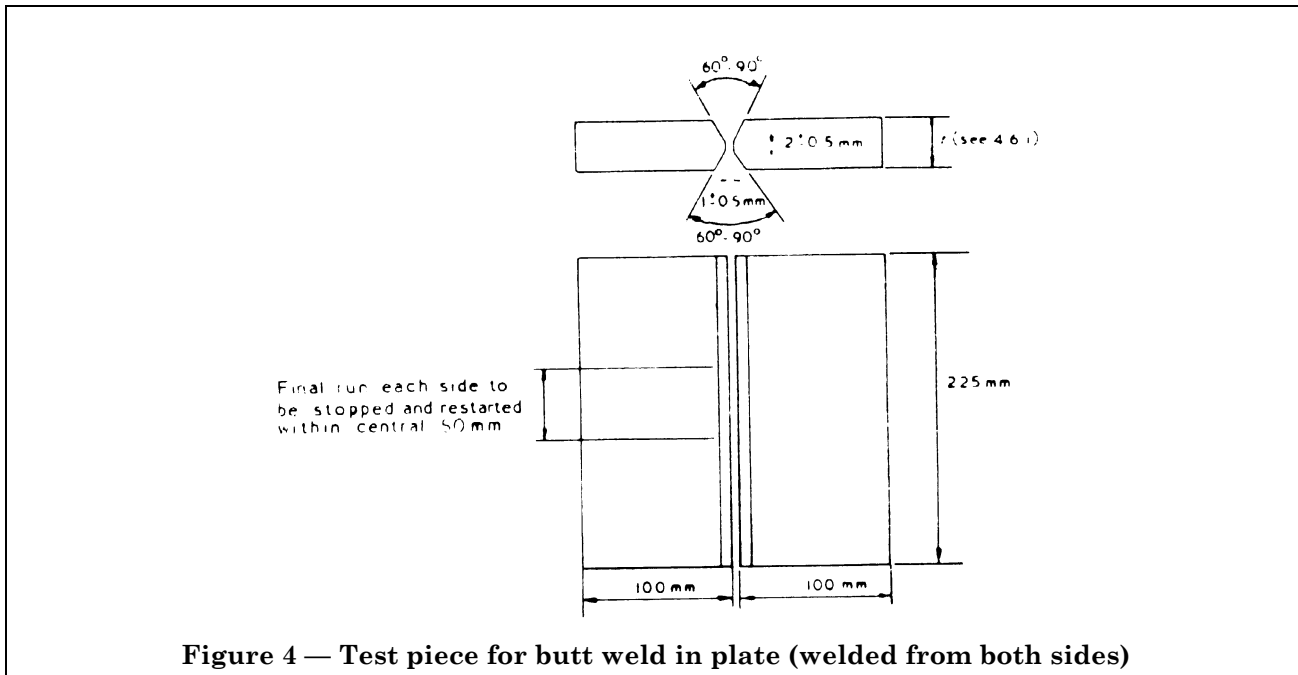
Test piece for butt weld in plate (welded from both sides)
